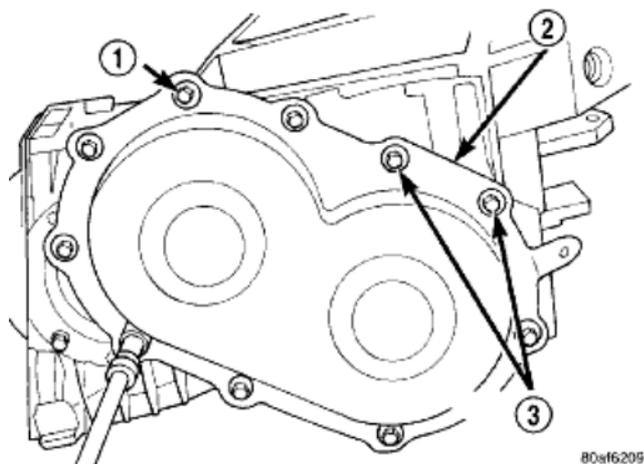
Removing/Installing Transfer Gear Cover-To-Case Bolts
